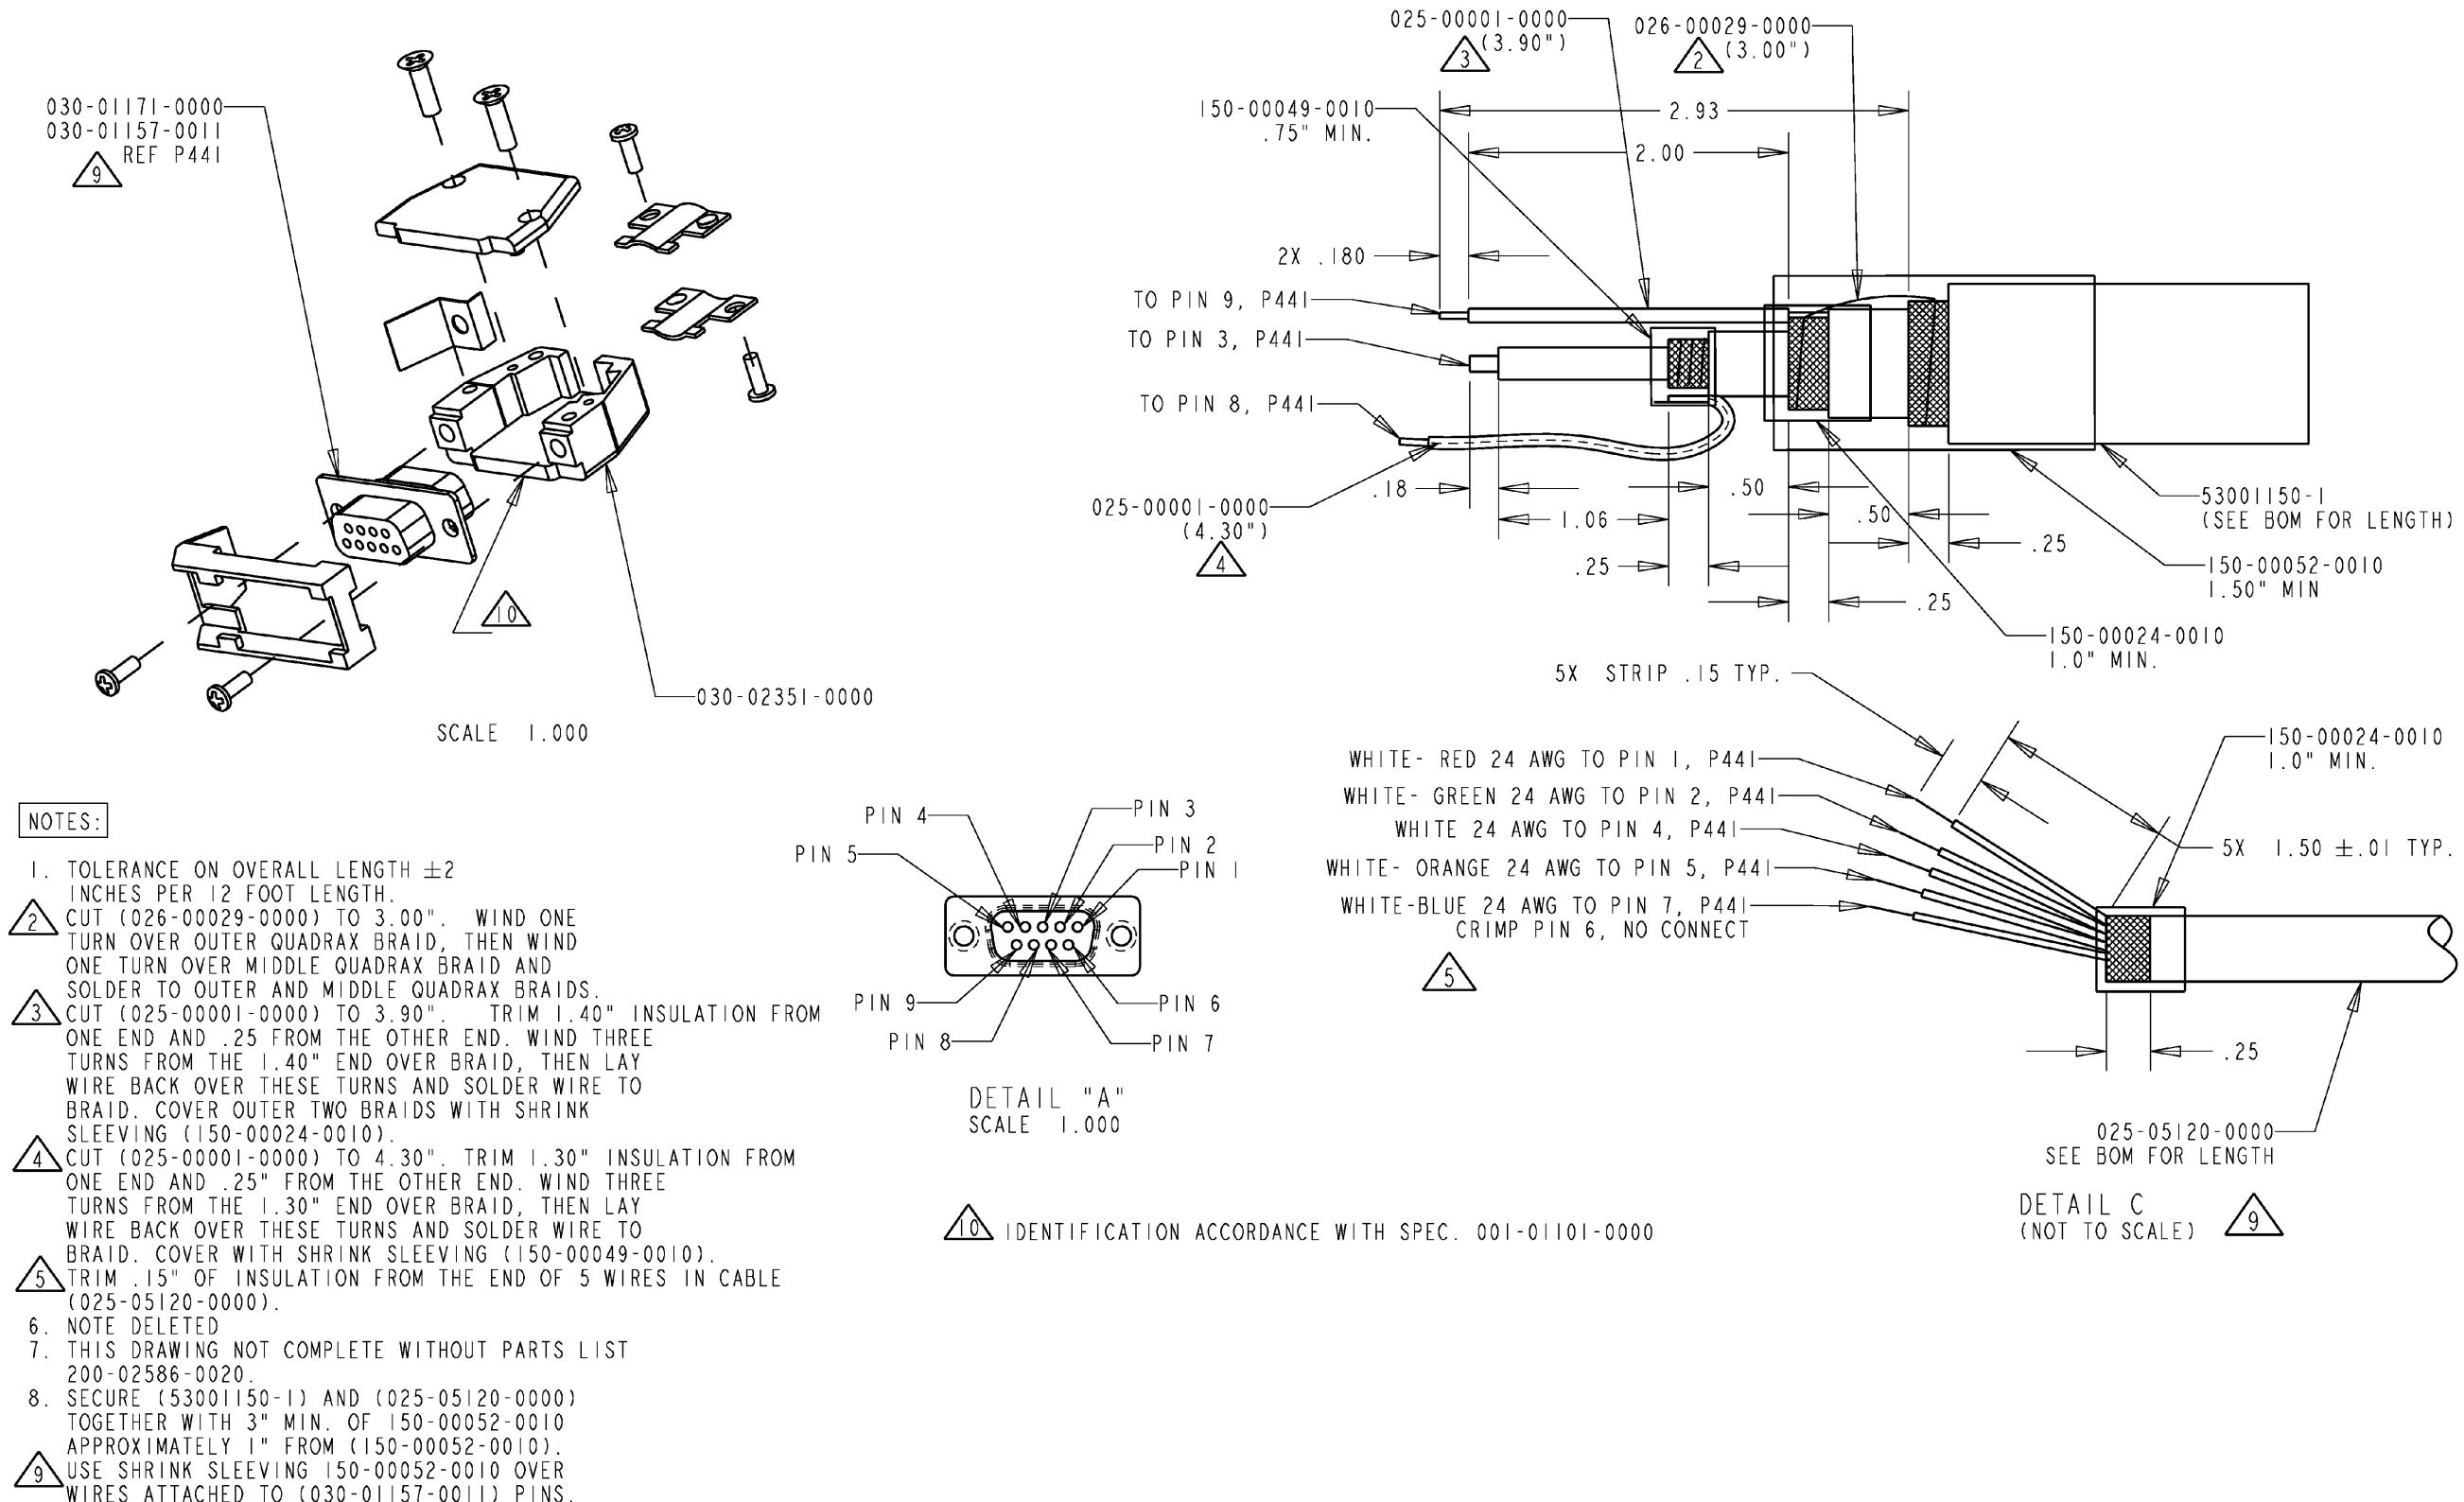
KA 44B ANTENNA CABLE ASSEMBLY (-0020)
